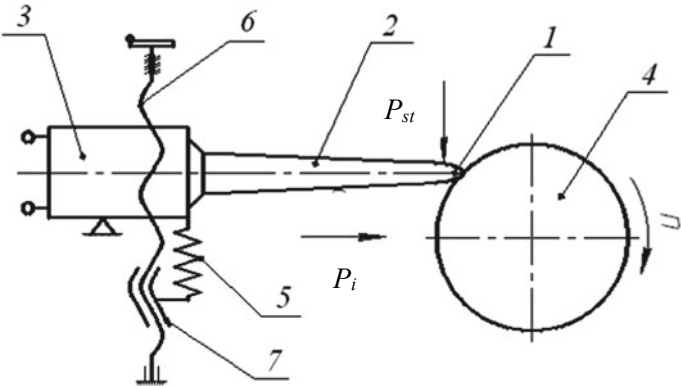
Loading diagram for hardening with a combined (static and dynamic) loads: 1–deforming tool; 2–concentrator; 3–ultrasonic generator; 4–workpiece; 5–spring; 6–lead screw; 7–nut
